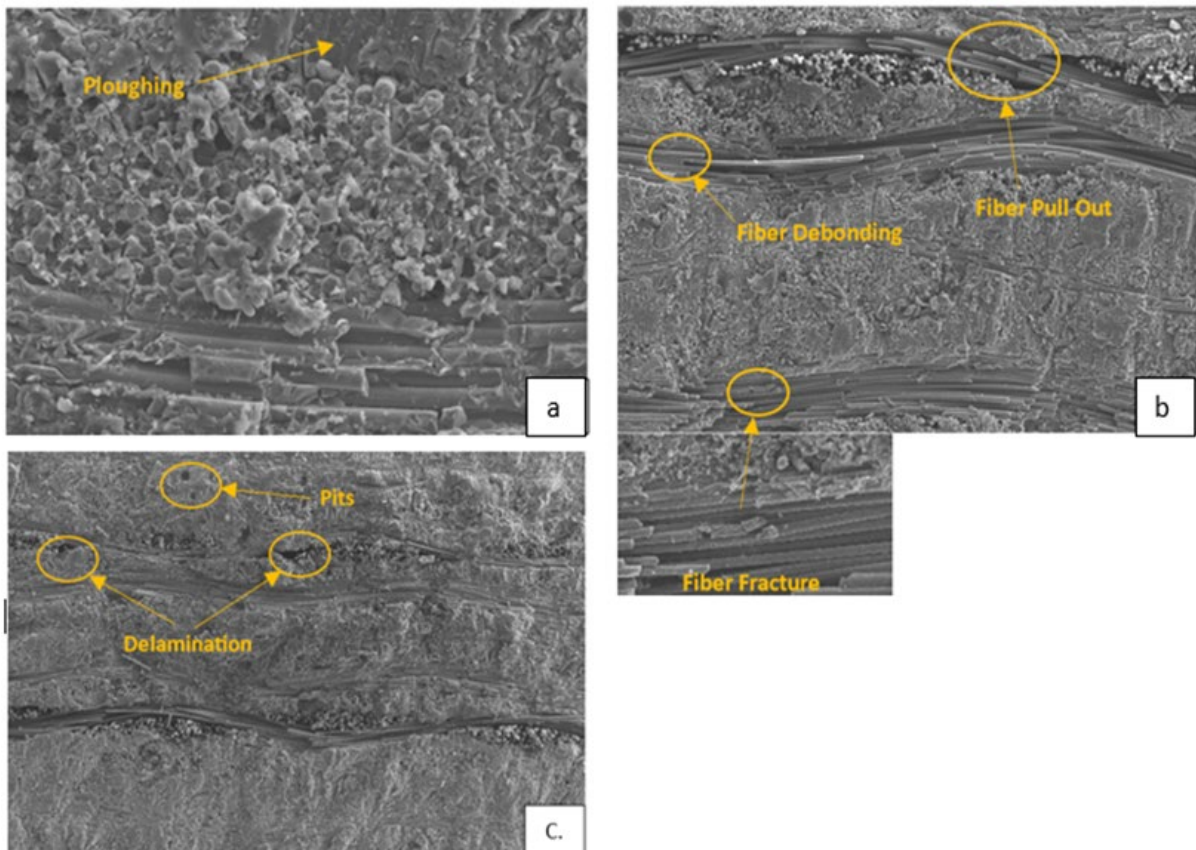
SEM images of machined surface (a) Ploughing groove; (b) Fiber pull-out, debonding, and fracture; and (c) Pits and delamination on the surface
